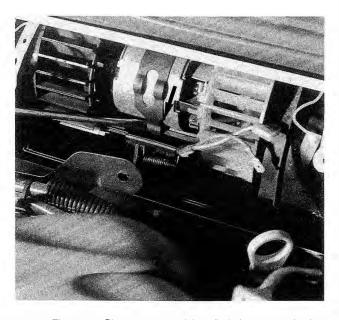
Blower motor retaining clip being removed using screwdriver (arrow).
